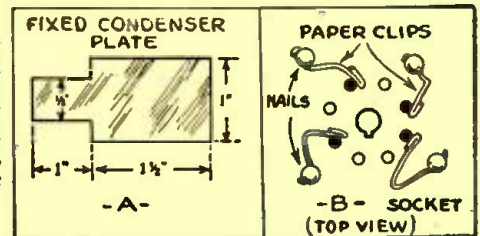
Showing shape and dimensions of fixed condenser plates at A, unique socket at B.
